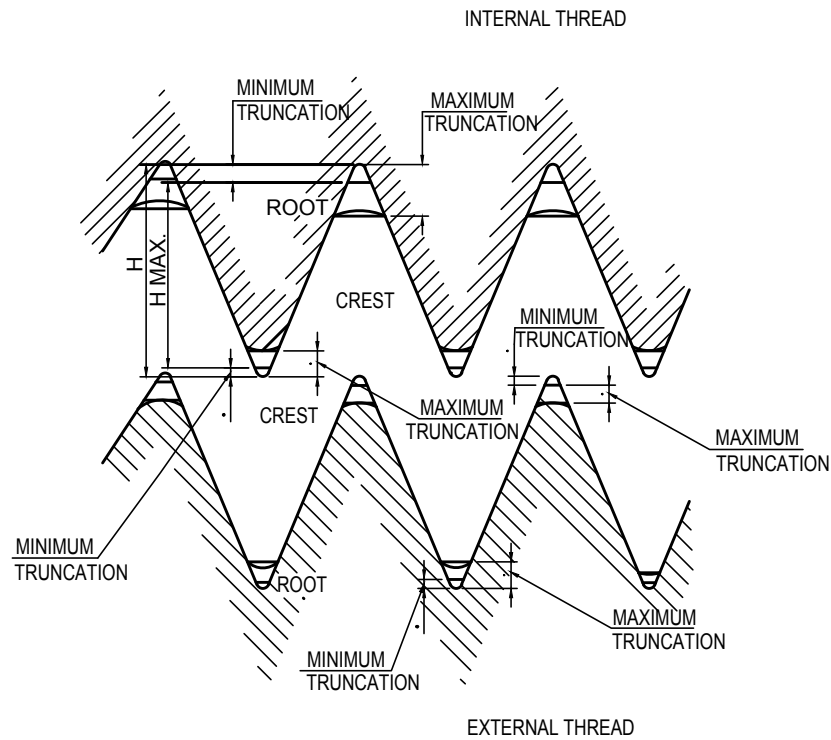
THREAD DETAILS AND LIMITS ON CREST AND ROOT TRUNCATION ON DIFFERENT TYPES OF TAPER SCREW THREAD
